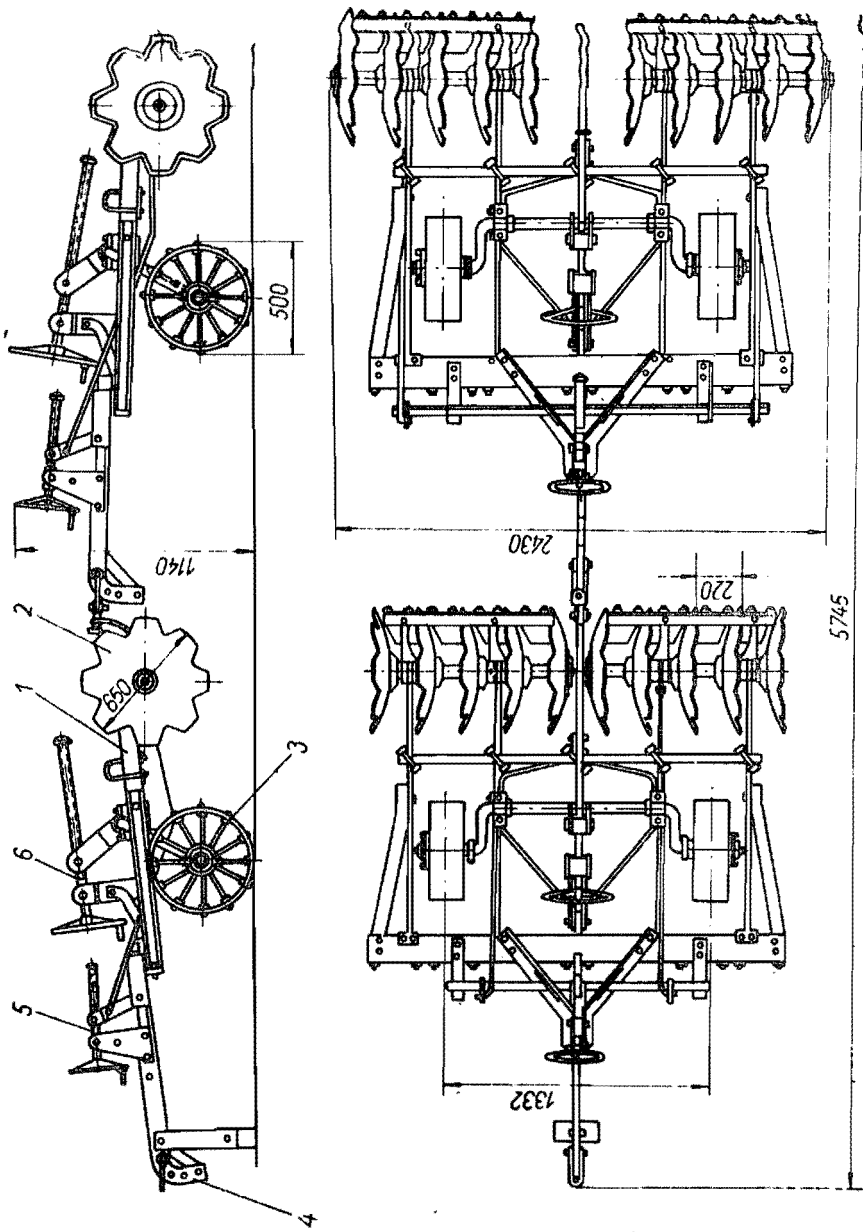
Aggregate of heavy disk harrows: 1 — frame; 2 — disk section; 3 — supporting wheel; 4 — hitch; 5 — spindle controlling supporting-wheel setting; 6 — spindle controlling supporting-wheel setting.
